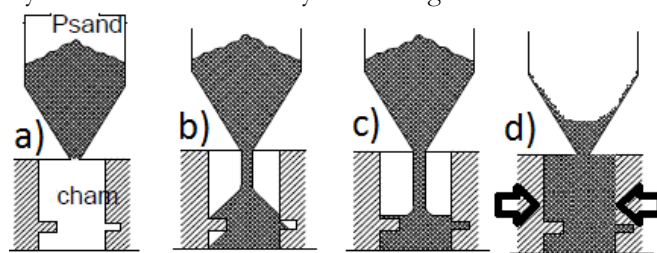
(a) The sand shot. (b) Conically shaped, “sand castle”. (c) Filling of the corners and the top of the mould. (d) Squeezing of the sand mould.
